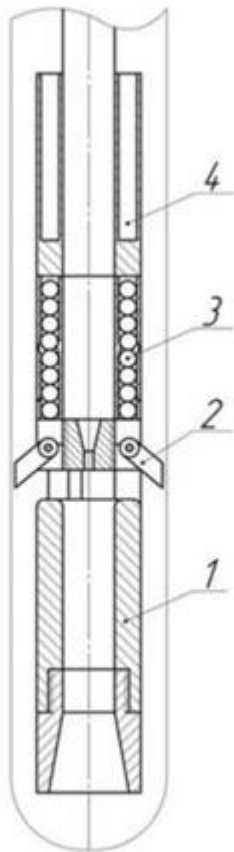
Bottom hole assembly (BHA) with the arresting and supplying apparatus.
